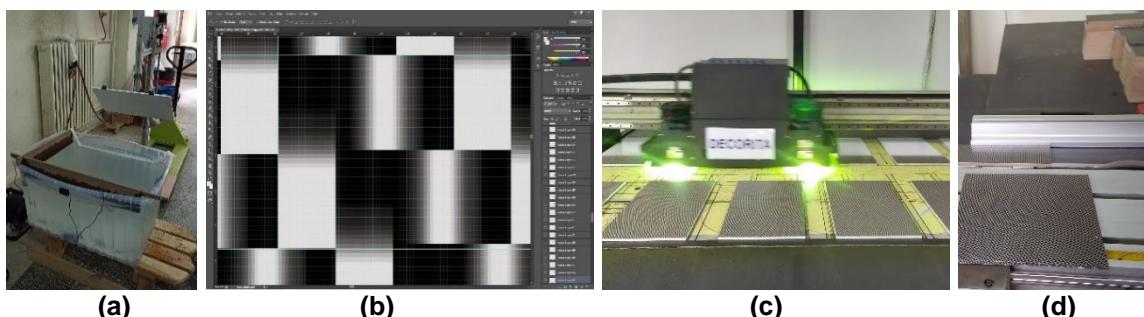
(a) WTP techniques, (b) Carbon fiber motif design, (c) UV printing techniques, (d) Cutting of samples
